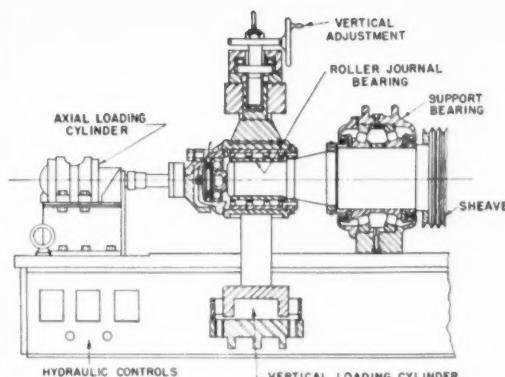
Section drawing of one end of the Railroad Journal Bearing Test Machine showing details of test box, support bearing and hydraulic loading units.
